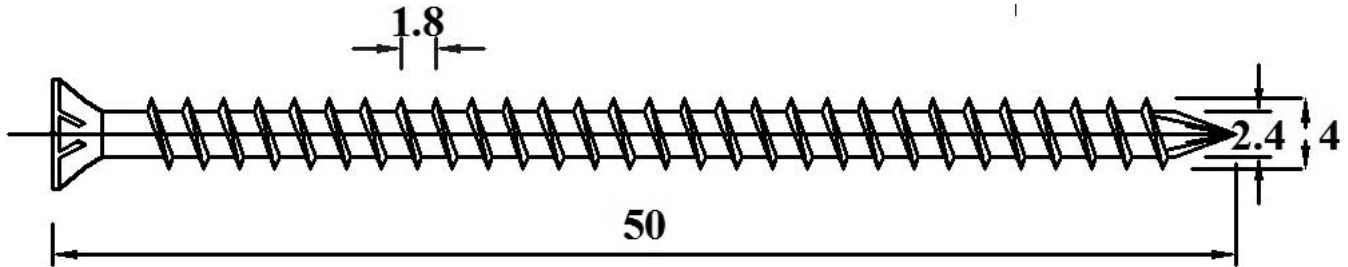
The 4 by 50-mm screw example (measurements in millimeters) used in the tests.
